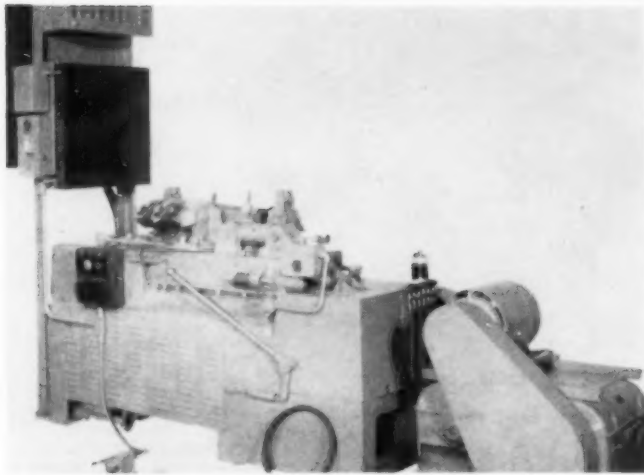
Air-operated vertical clamps are employed in this motor-operated flash welder for the production of fly-wheel ring gear blanks. Electrical controls on the left of the machine are used in automatic annealing of the weld zone in the machine immediately after welding.
